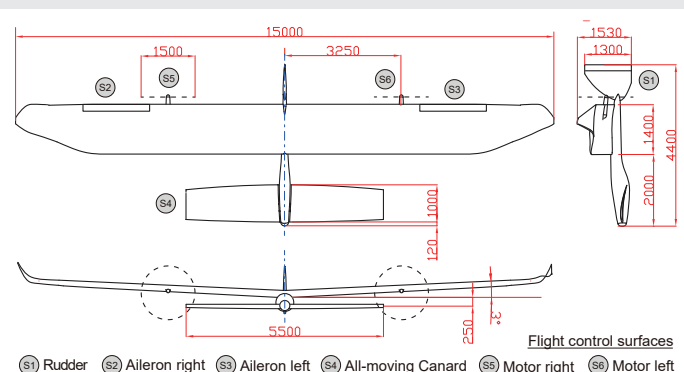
Three view plan of the SPAMA and flight control surfaces.
